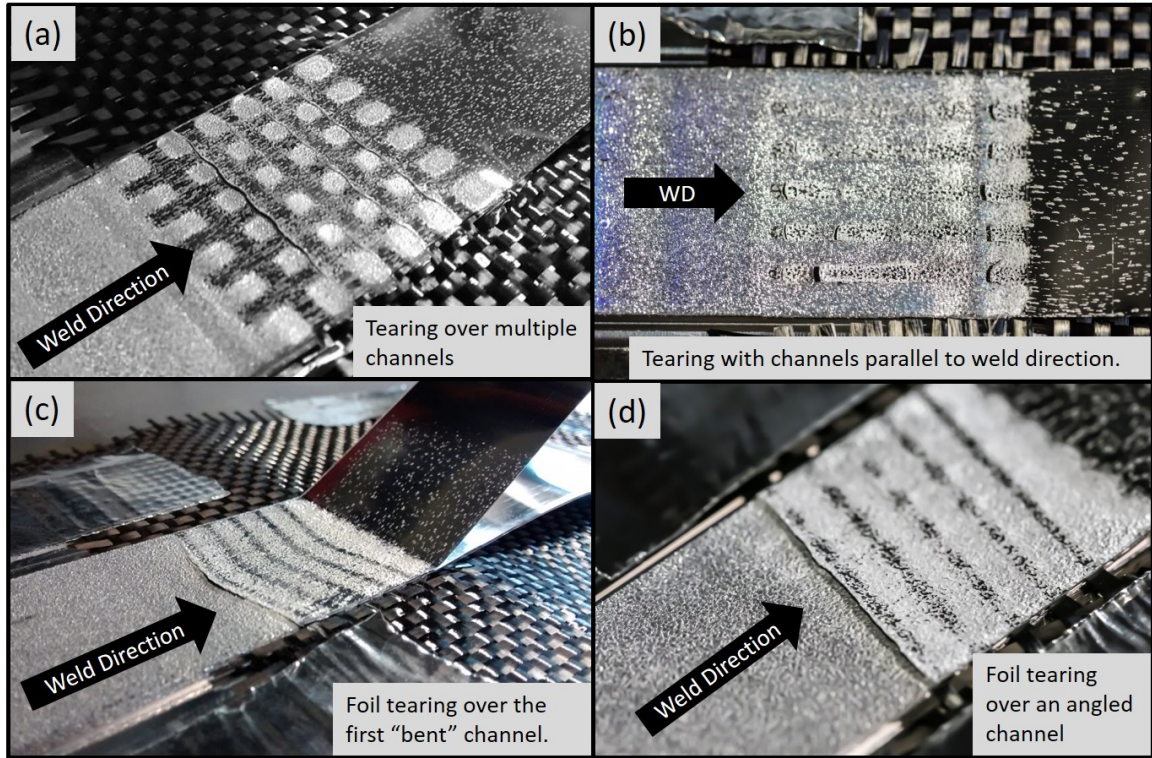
Foil tearing examples. (a) Multiple tear locations while welding over cross-hatch channels filled with CF tows. (b) Case of foil tearing where the channels run parallel to the welding direction. (c) Foil tearing over the first channel with a "bent" channel design. (d) Foil tearing over the first channel with a angled design.
